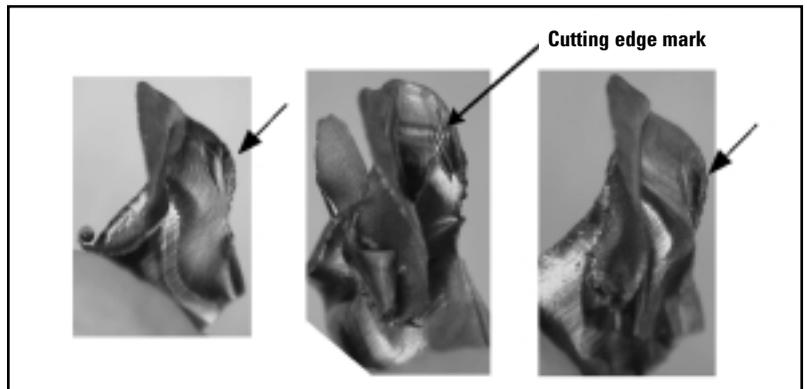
Cutting edge marks found on the same position of chips, observed under dry cutting.
